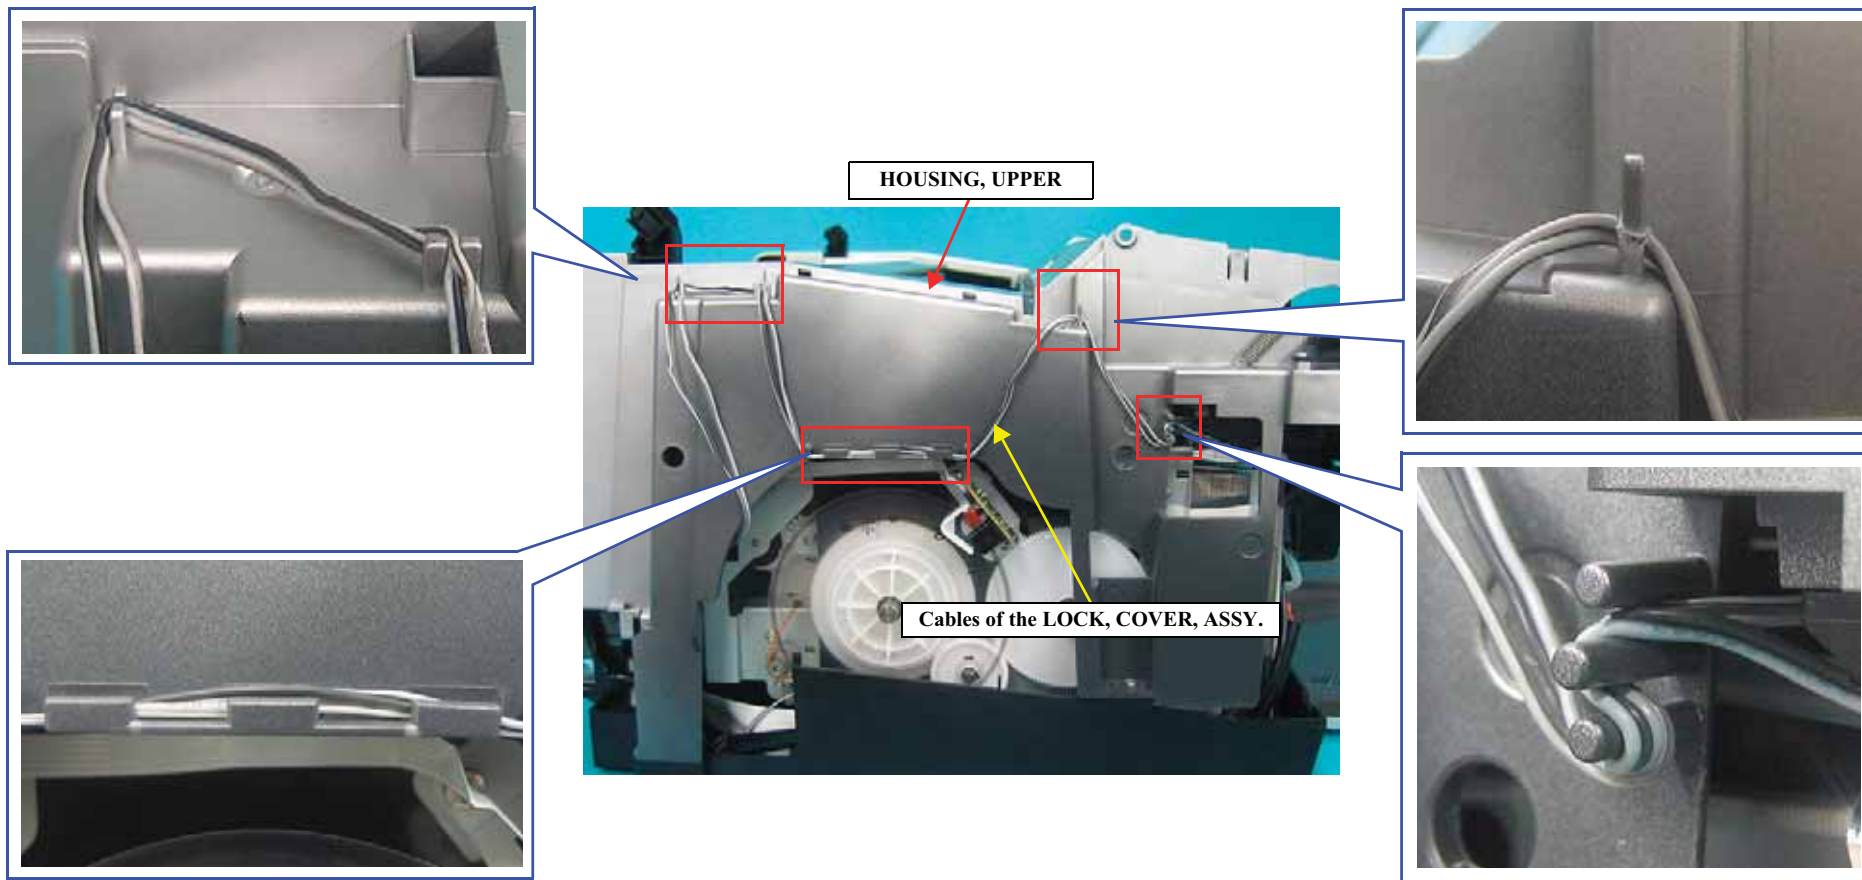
Routing the LOCK, COVER, ASSY. Cables
